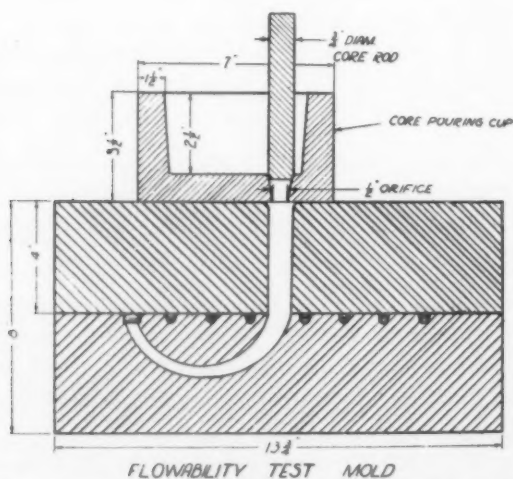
CROSS-SECTION OF MODIFIED SAEGER-KRYNITSKY FLUIDITY SPIRAL MOLD USED IN THIS INVESTIGATION.
